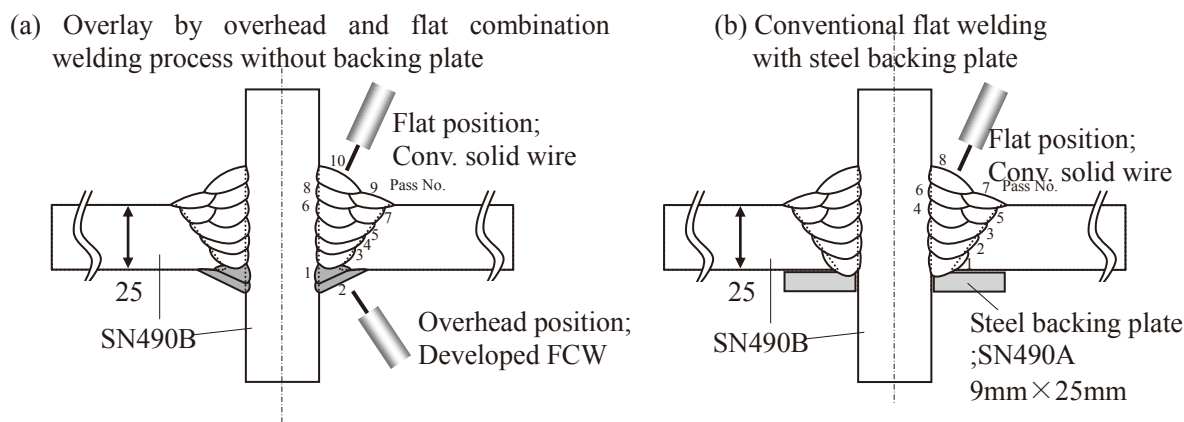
Pass sequence for cruciform weld joints
